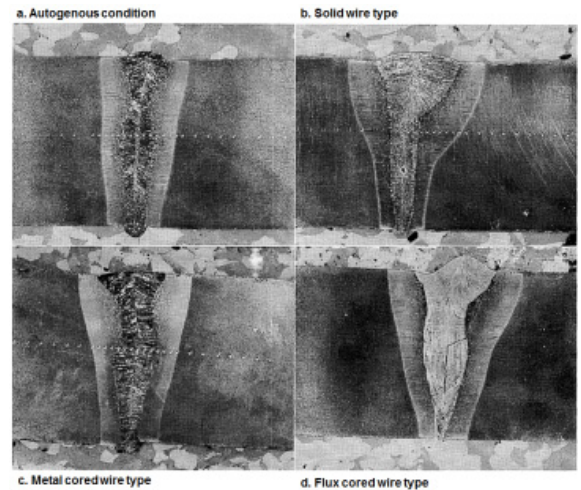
Form of weld according to welding consumable<sup>[20]</sup>
